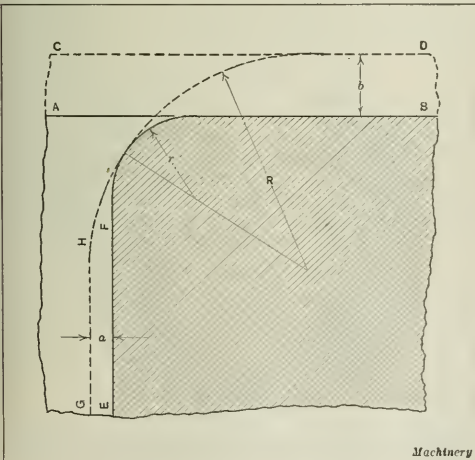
Section of Roller Bearing Cone illustrating Tangency Problem
